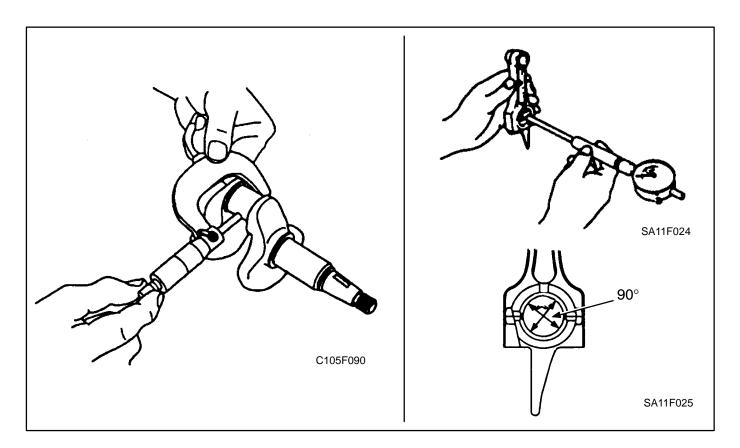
CRANK PIN AND CONNECTING ROD CLEARANCE
